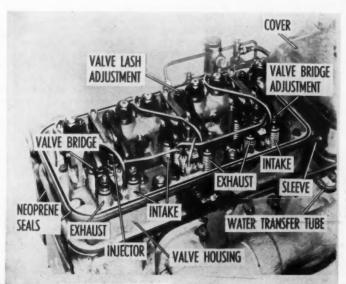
The in-line engine has two cylinder heads made from coppernickel-chrome gray iron castings. Each head serves three cylinders.
